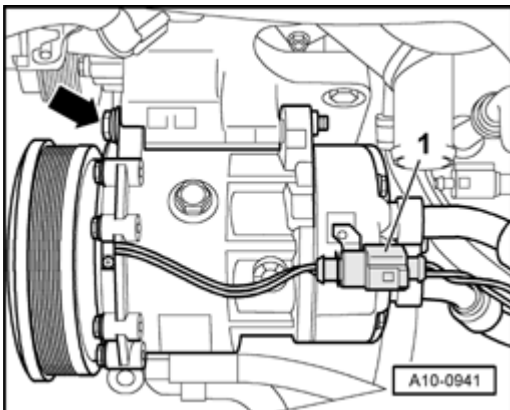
Disconnecting Electrical Connector For Air Conditioning Compressor Clutch
